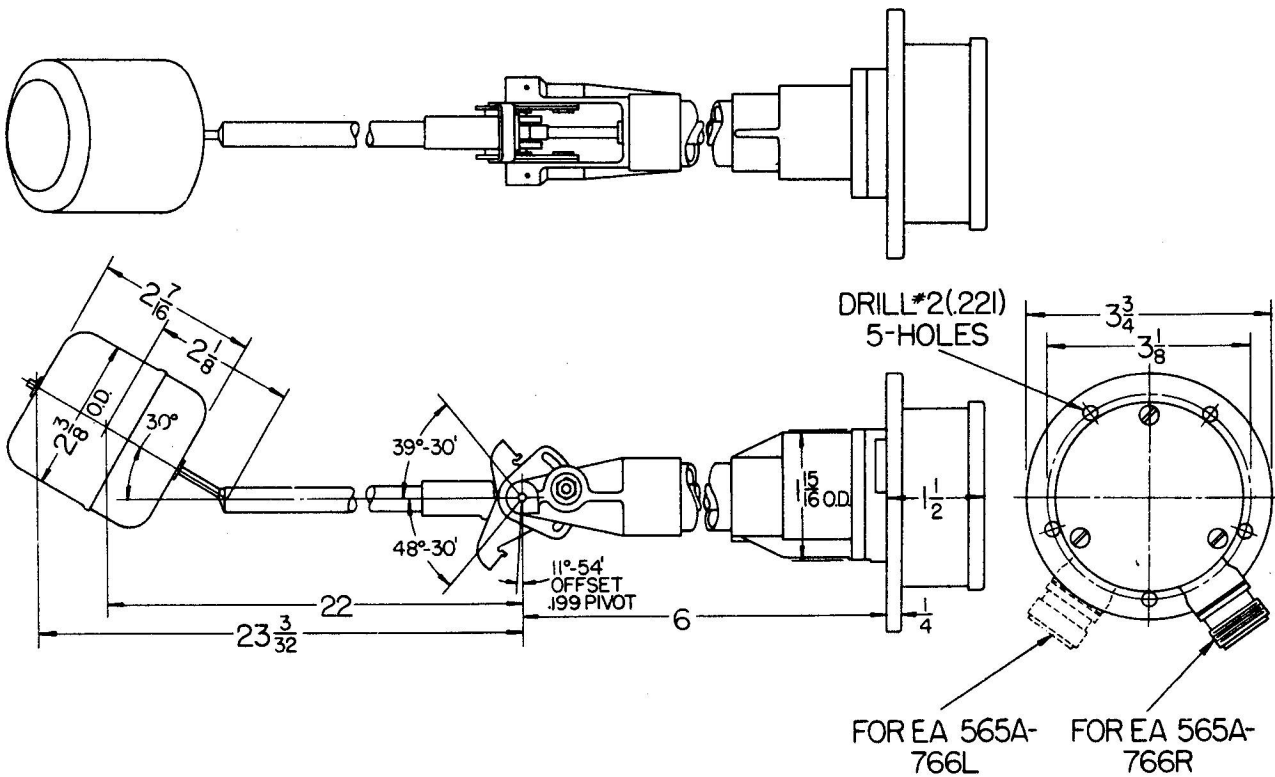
(Sheet 3 of 9 Sheets). General Dimensions
